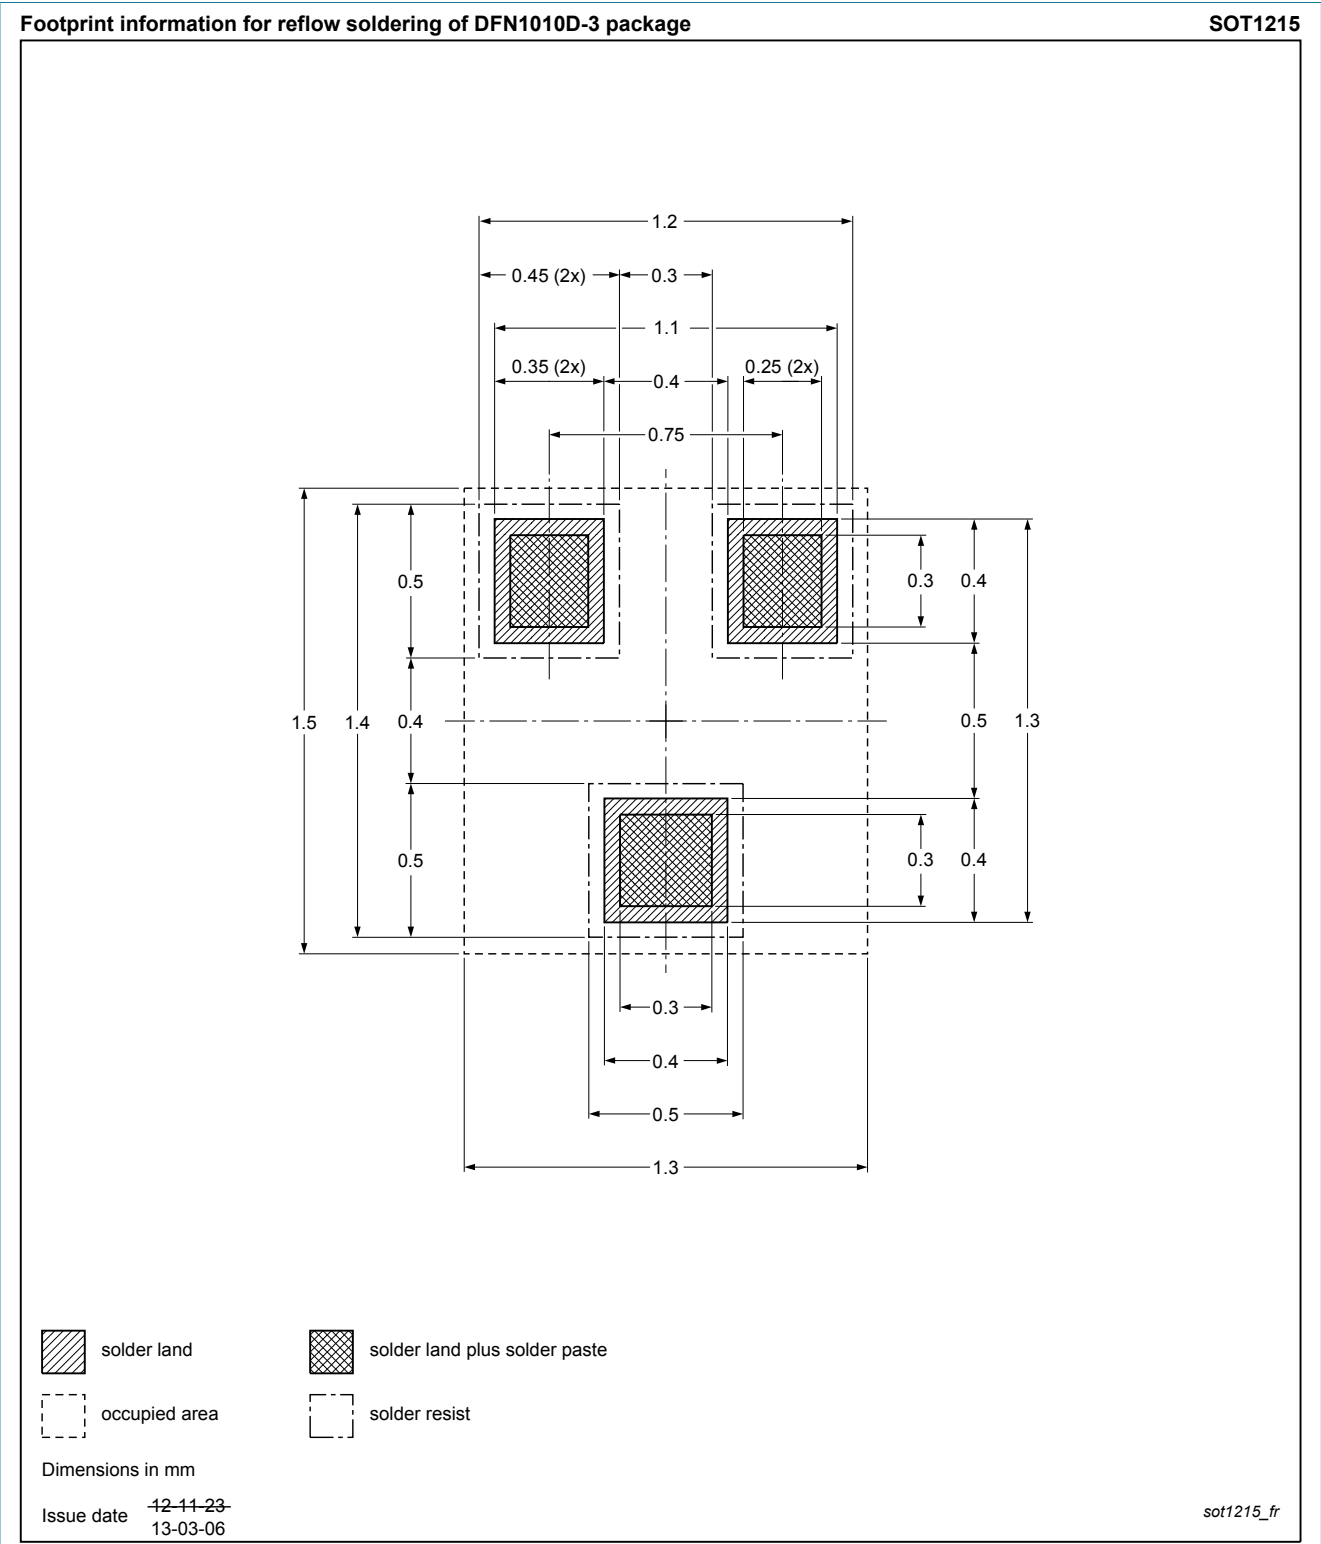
Reflow soldering footprint for DFN1010D-3 (SOT1215)
